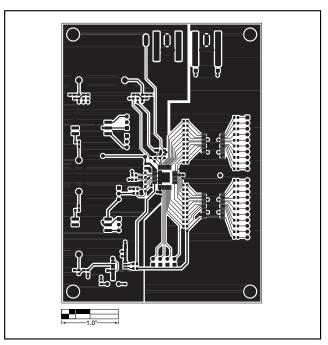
MAX1181 EV Kit PC Board Layout—Component Side
